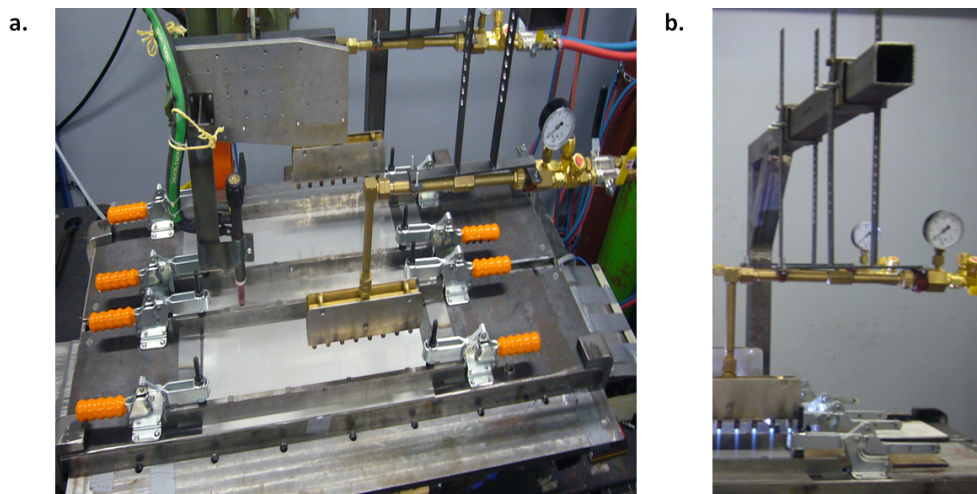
(a) Welding with additional heating set-up for larger plates ($500 \times 250 \times 2$ mm³ and $500 \times 250 \times 6$ mm³) and (b) fixture with adjustable height.
